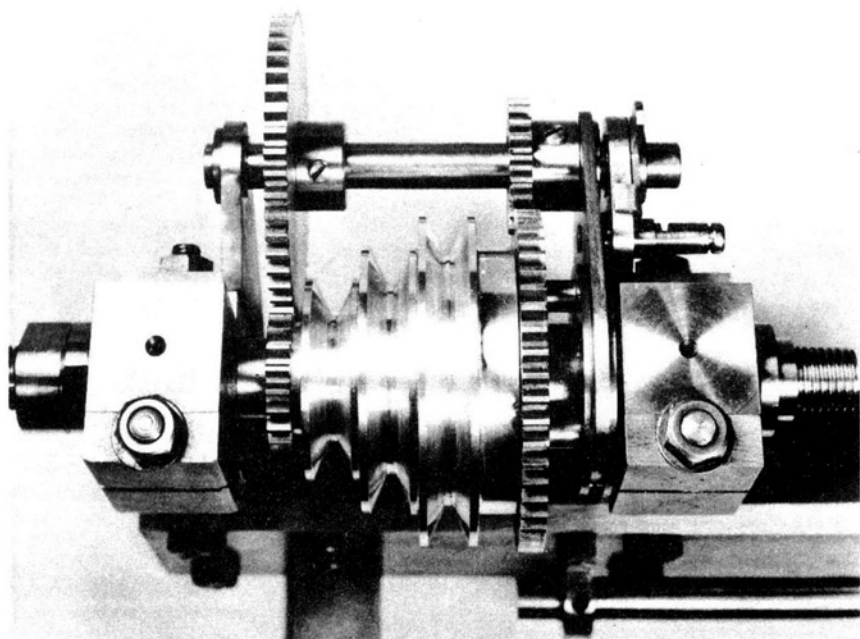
Back gear engaged; gears in mesh and driving pins withdrawn from pulley.
